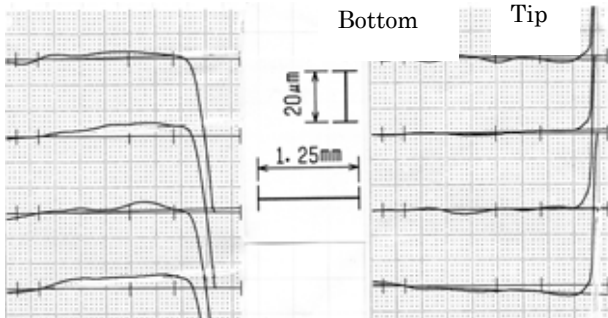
(a) Tooth accuracy after 367pieces hobbing
